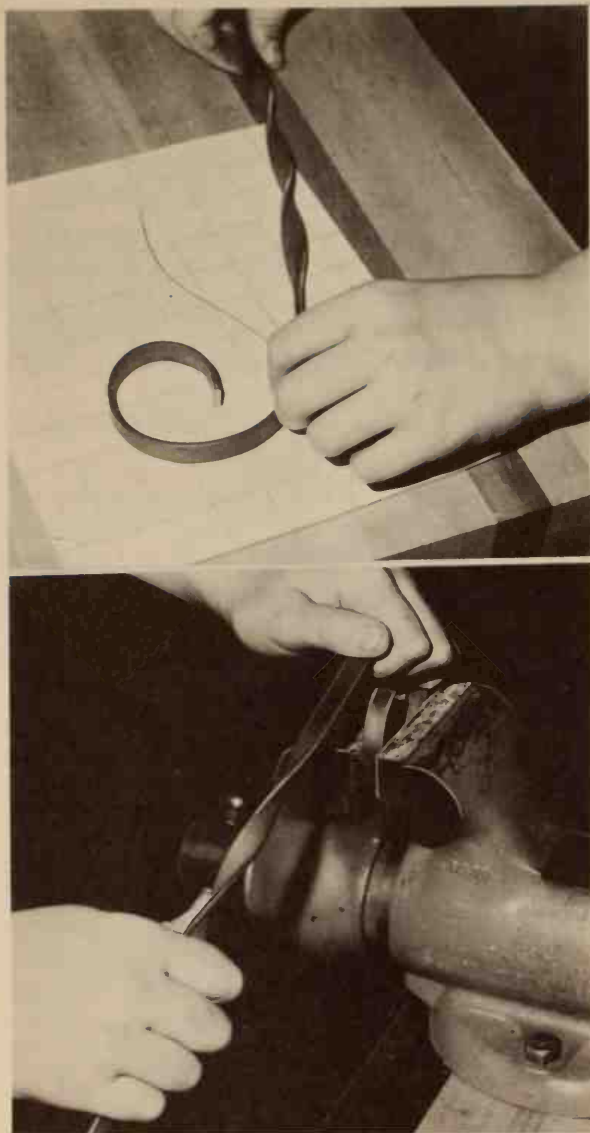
Above, Checking scroll on a full-size pattern.
